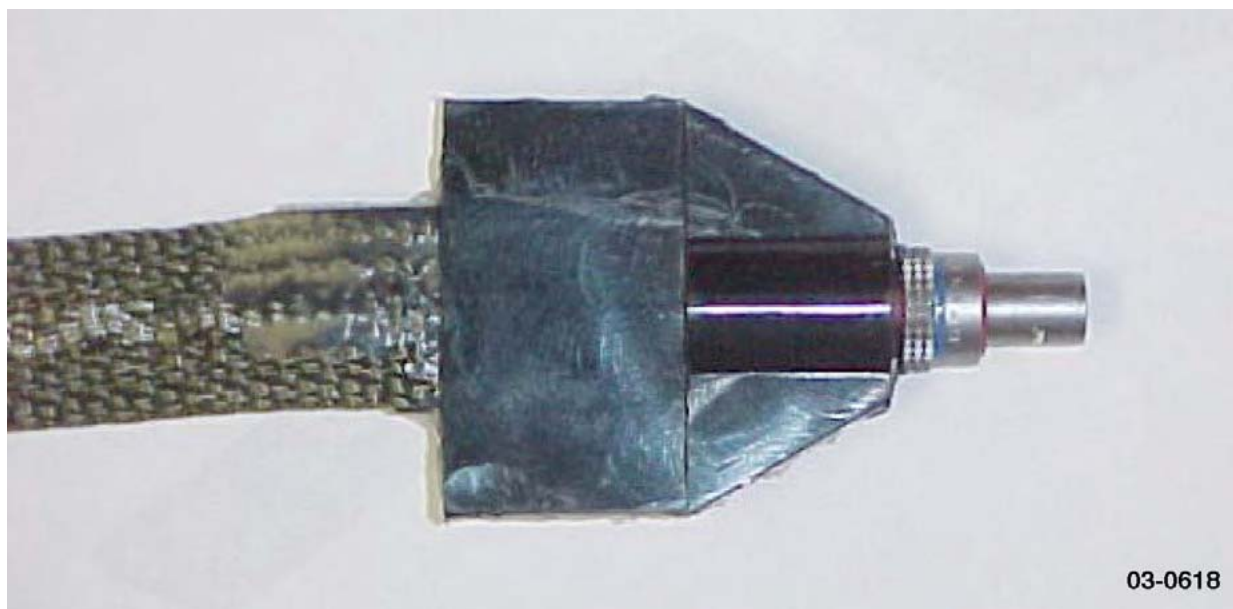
Prototype 5-pin lemo thermoset overmold (top view)
